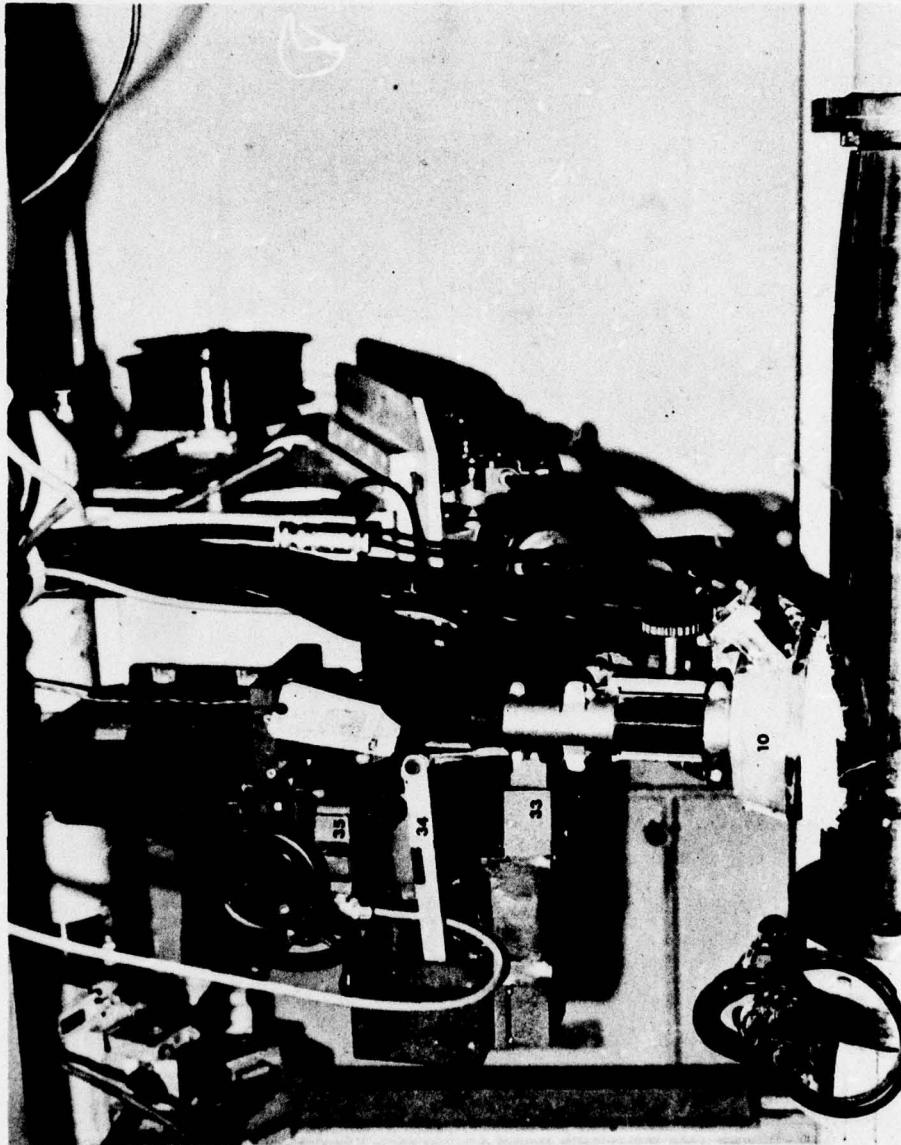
Oscillator Features and Off Center Slide Adjustment for PAHW Torch Assembly.
